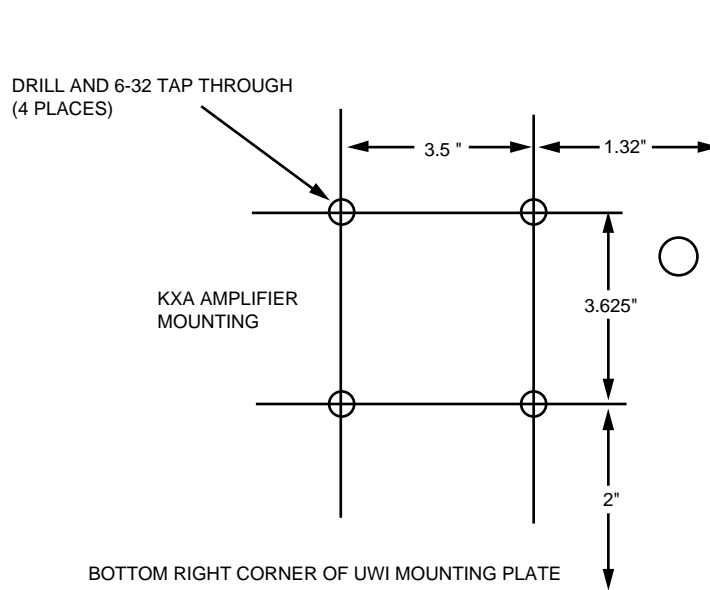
KXA Motor Speed Control Mounting Dimensions
